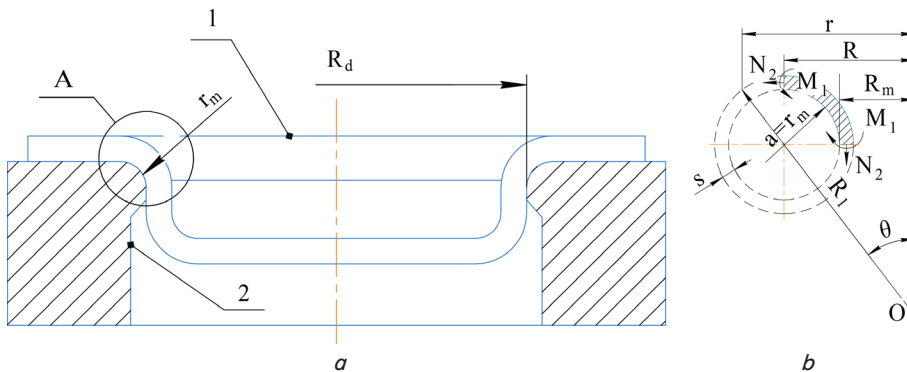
Schematic drawing of a cylindrical workpiece (punch is not shown): *a* – selecting the investigated area: 1 – part; 2 – matrix; *b* – remote element of the workpiece section in the form of a part of the toroid surface
